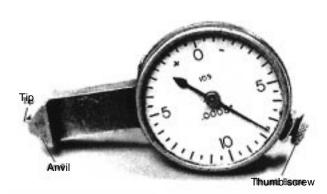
Balanced-Dial Type Gauge for Measuring Thread Height of Internal Threads and All External Threads
